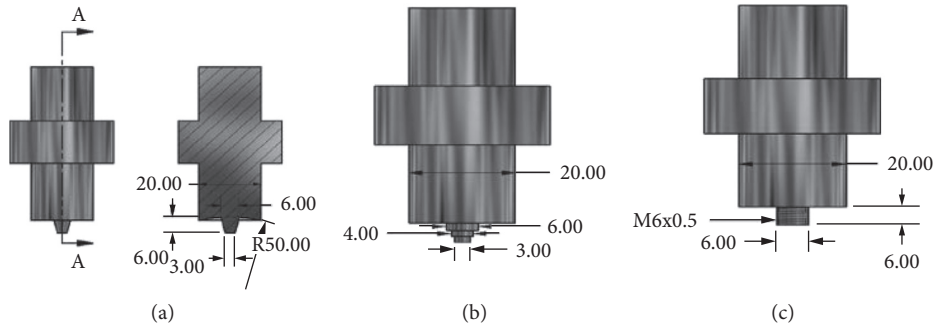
Design of the friction stir welding tool. (a) Involute type (IT). (b) Step type (SS). (c) Thread type (ST).
